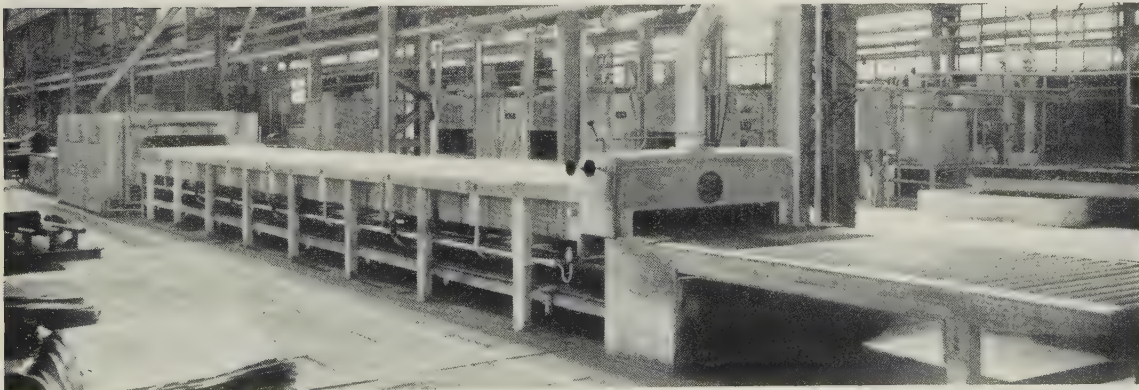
Mesh-Belt Conveyor Furnace for Annealing of Sheets.
